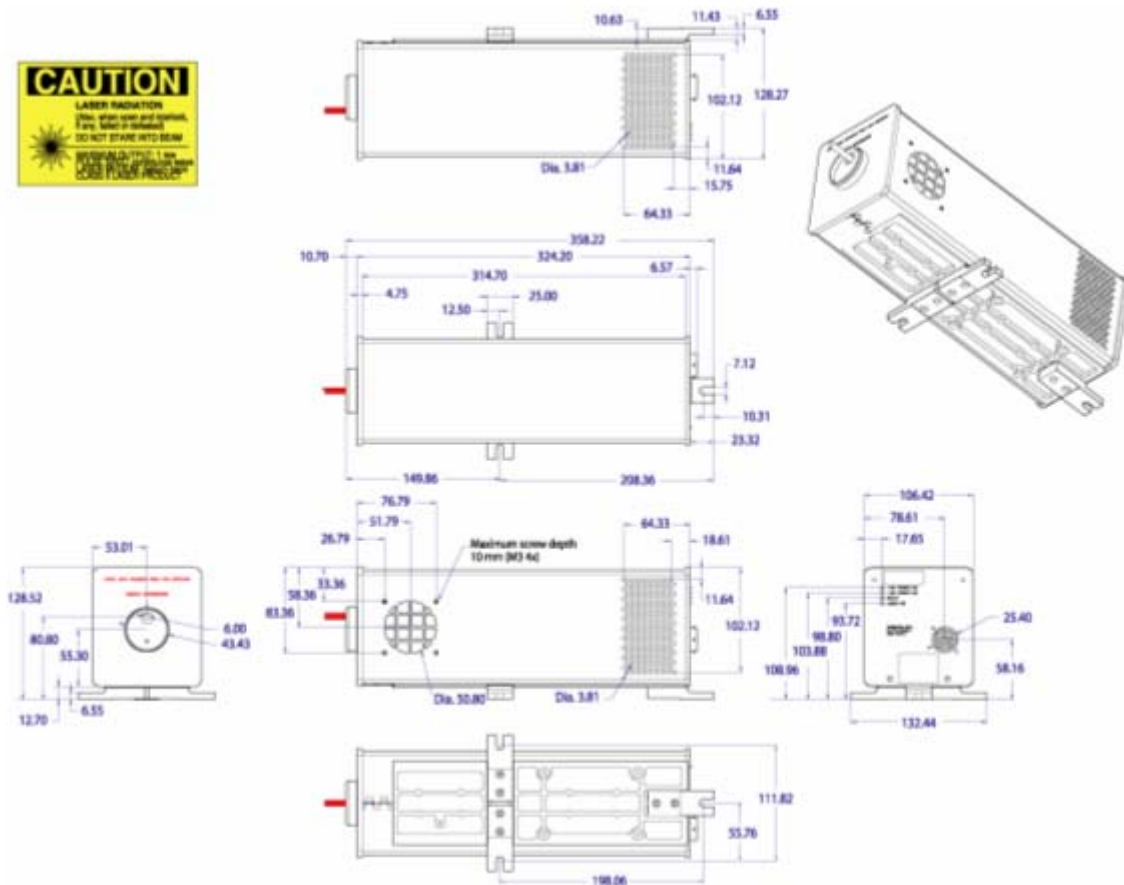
Specification sheet for the Agilent 5517GL laser head showing laser dimensions. Note that a different mounting arrangement will be used so the three feet shown here will be removed (see RD7).
